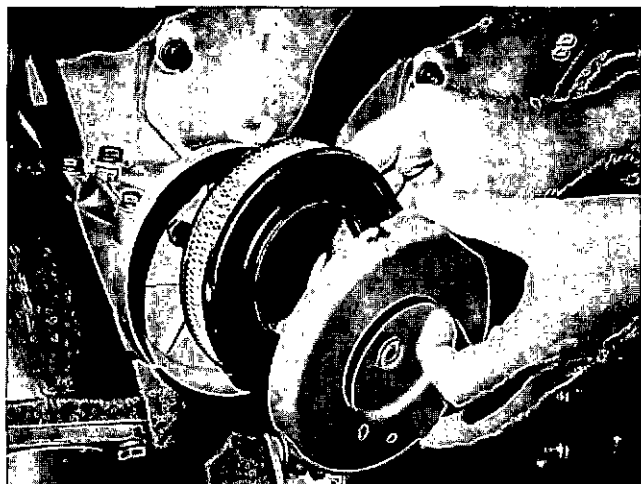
, V414209, Cummins air compressor breather — paper element
